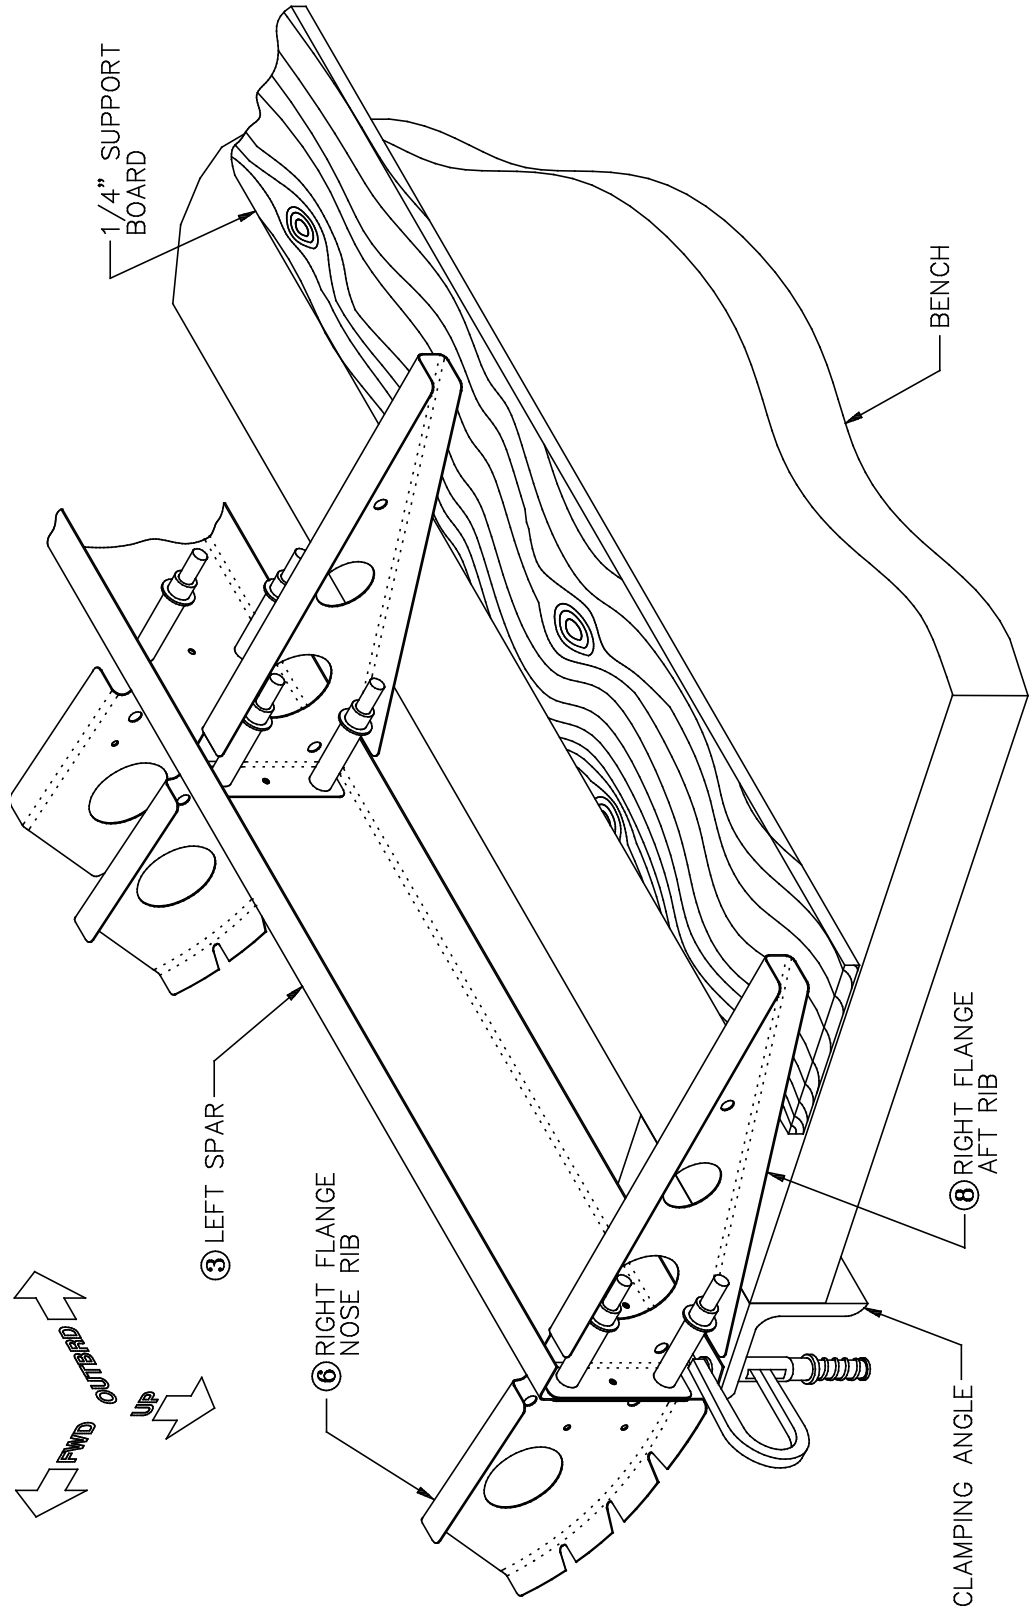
Clamping the Spar/Rib Assembly to the Bench
